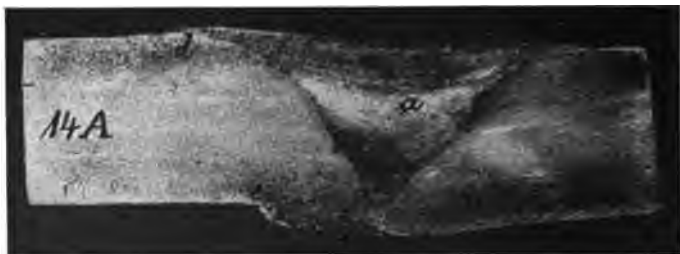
Imperfect, superheated, and carbonized welding seam.
